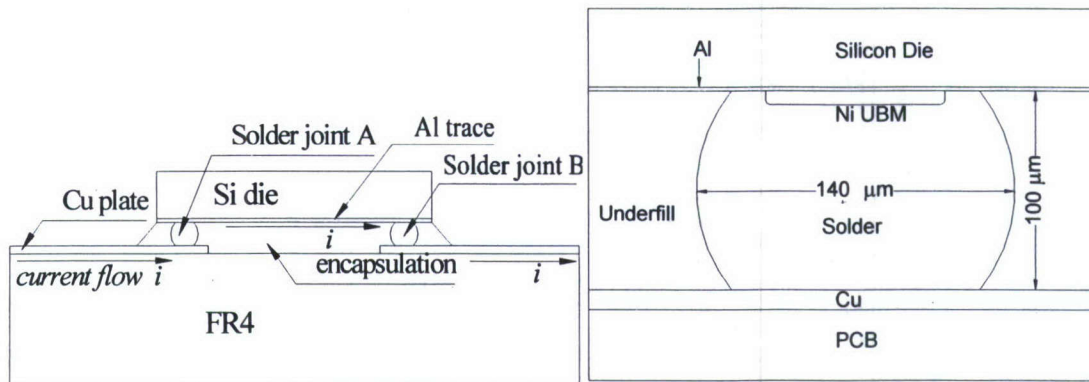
Cross Section of Test Module and Solder joints (Ye et al. 2003a)
